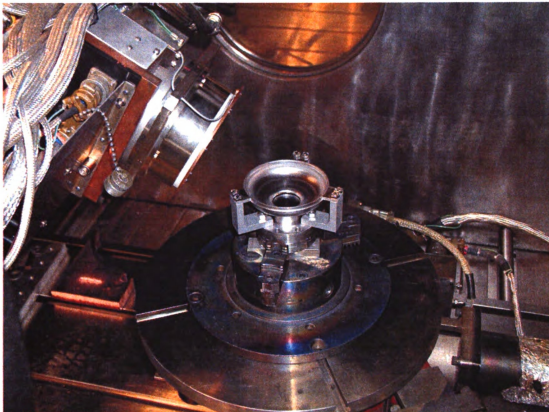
Setting up for an iris weld inside the vacuum chamber of the electron beam welder. The electron gun is visible on the upper left. Parts for a single cell  $\beta = 1$  cavity are shown; the welding of the 2-cell cavity was done the same way.
